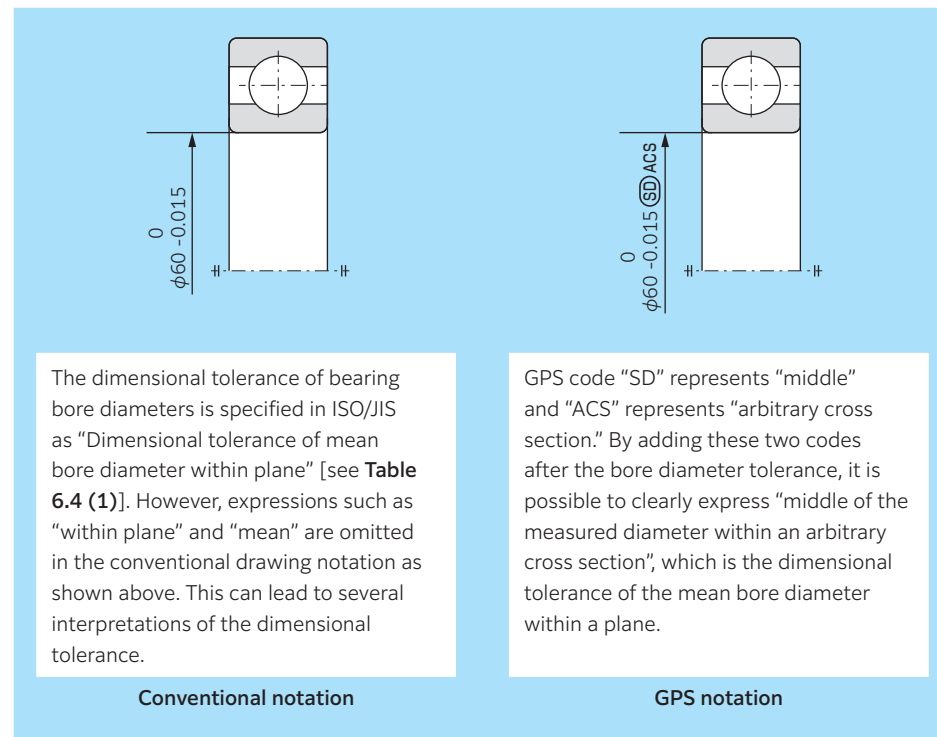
Notation example of bearing bore diameter tolerance
